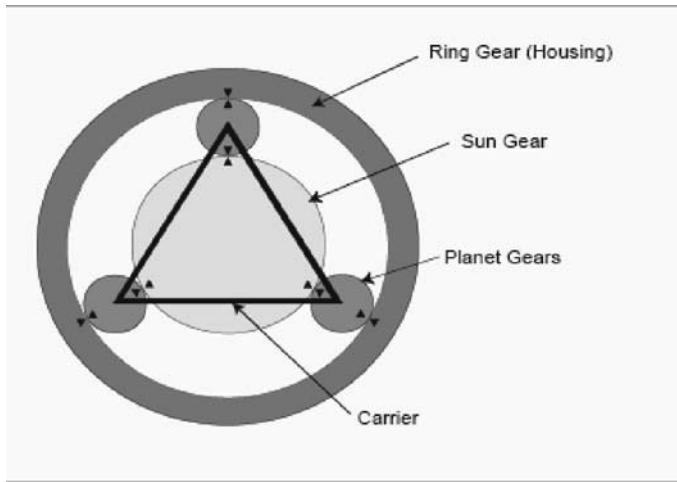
Elements of a simple planetary or epicyclic gear train [14]
